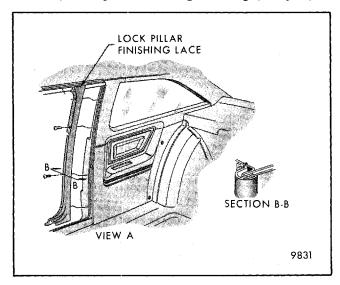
Body Lock Pillar Finishing Lace - A Styles
